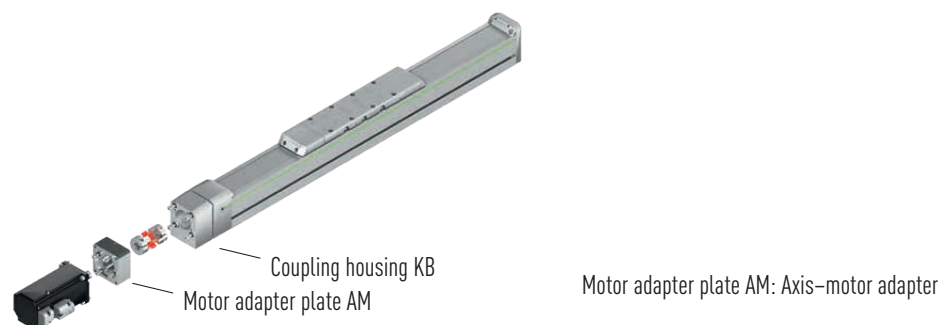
Motor adapter of the linear modules HM-S without belt drive
